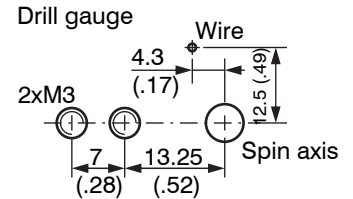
Dimensional drawing WDS- ... - MPM, dimensions in mm (inches)
